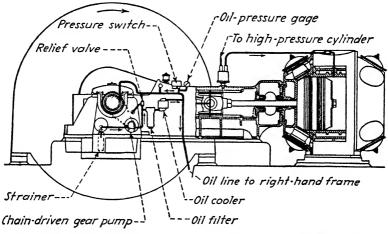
Force-circulation oiling for running gear. (Courtesy of Power.)
